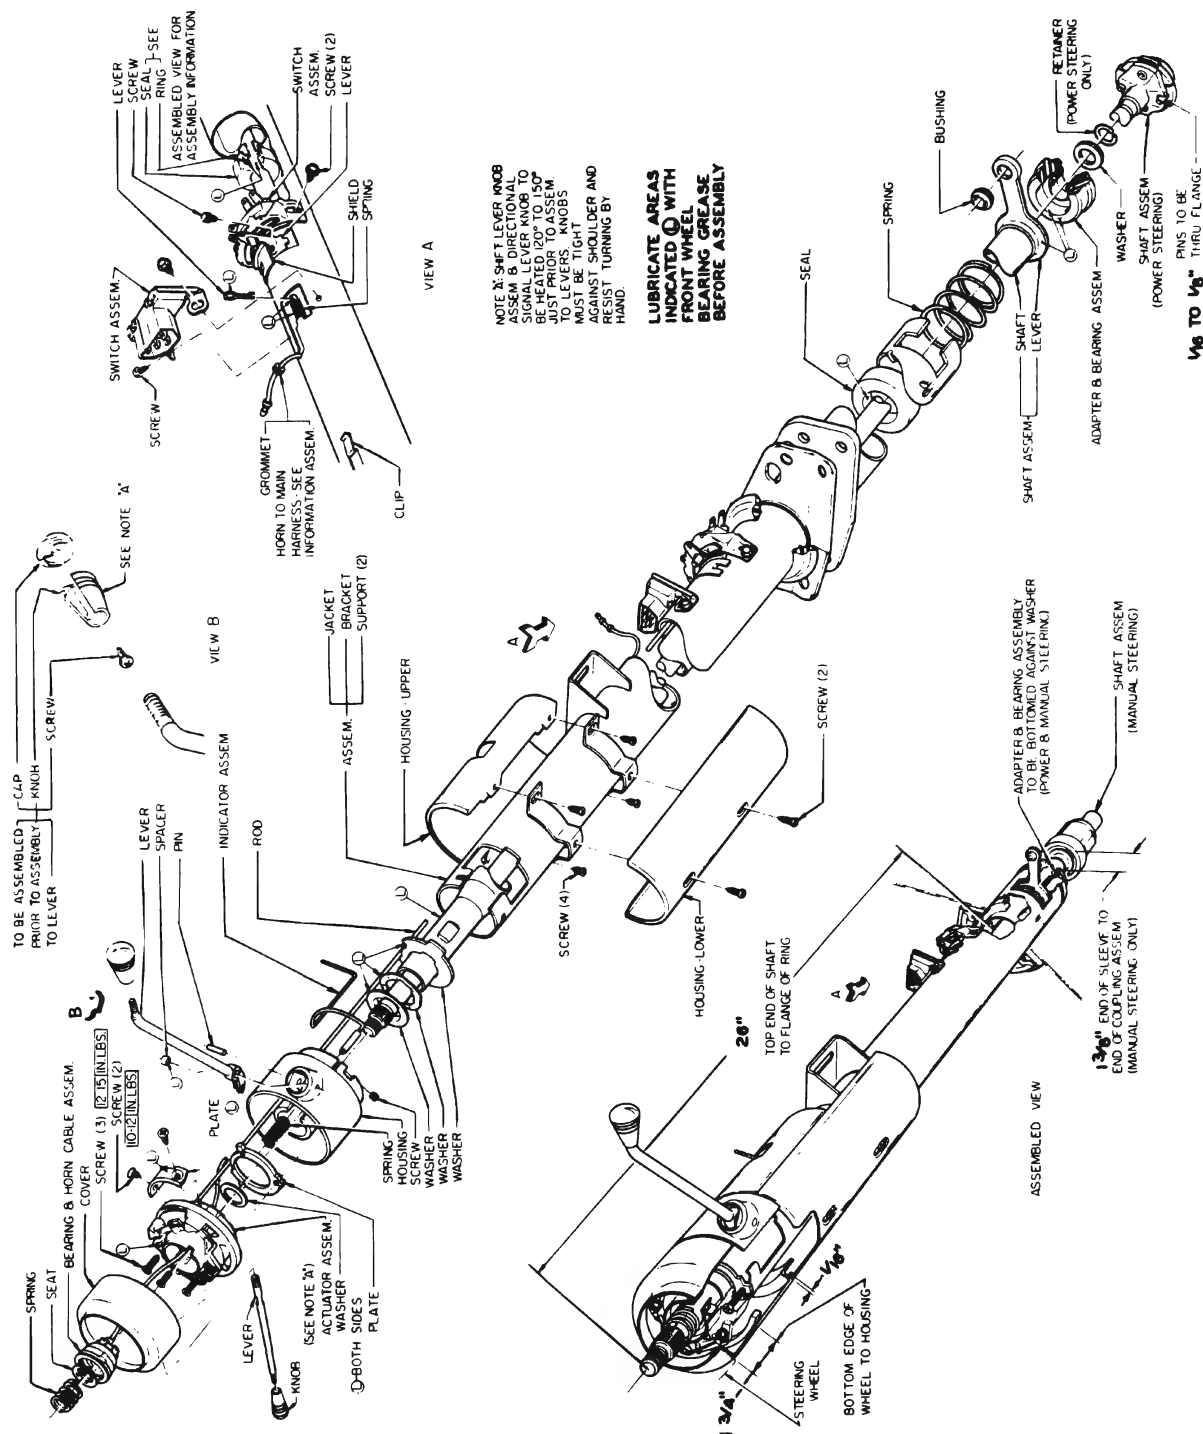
Steering Column Jacket and Transmission Control Shaft Assembly—4400-4635-4800 with Automatic Transmission
